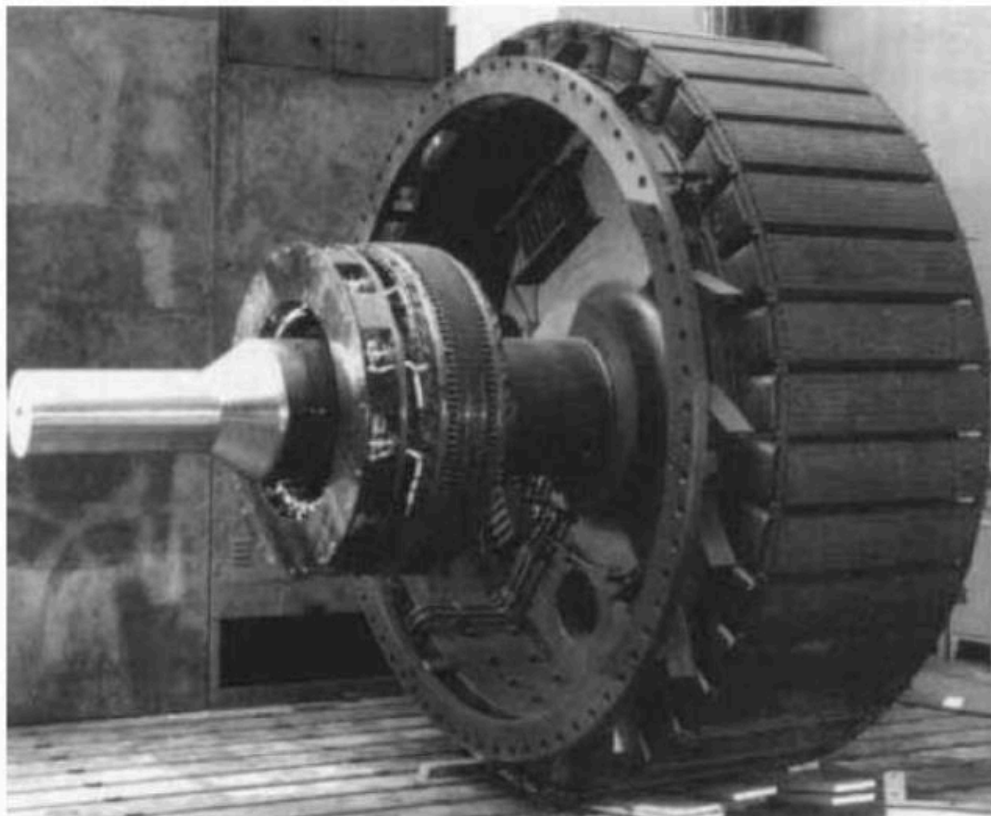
Photograph of a synchronous machine rotor with a brushless exciter mounted on the same shaft.
